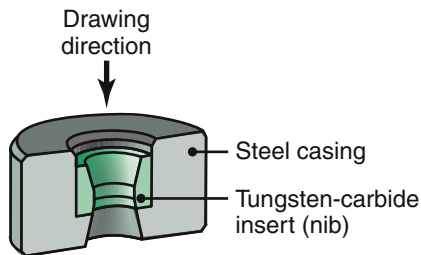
Tungsten-carbide die insert in a steel casing. Diamond dies used in drawing thin wire are encased in a similar manner.
